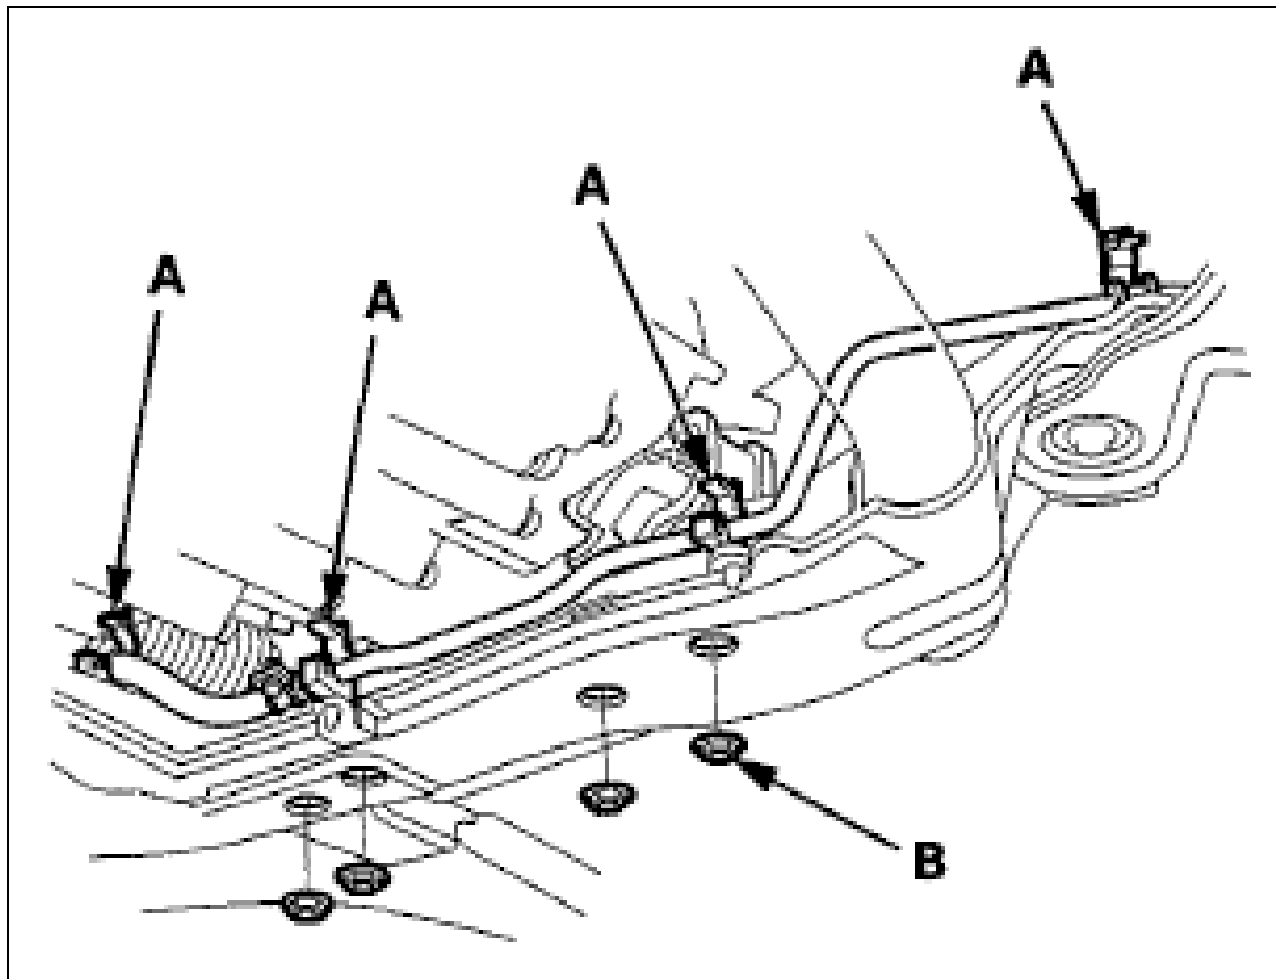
Identifying Steering Gearbox Mounting Bolt And Steering Gearbox Stiffener
